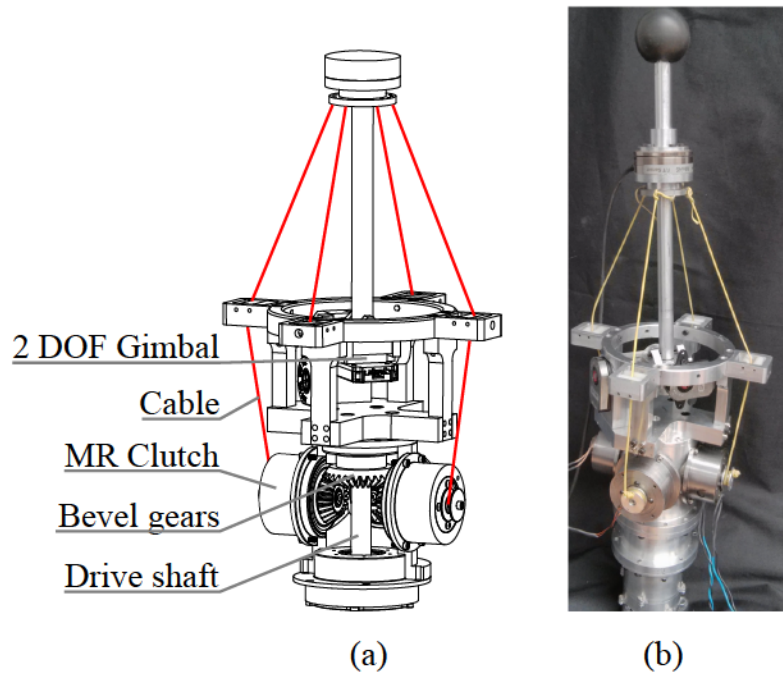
2-DOF prototype of a TDM actuated by magneto-rheological clutches : a) CAD view of the MR clutches and cable attachments (front MR clutch has been removed for better view of the drive system) ; b) prototype.
